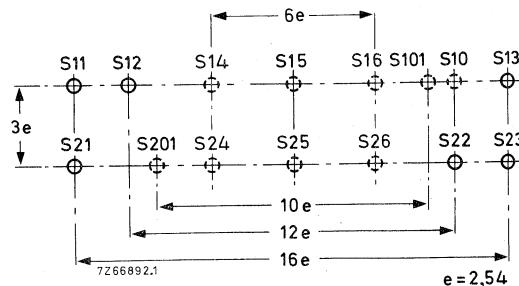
Hole pattern of the printed-wiring board for a tandem potentiometer (viewed on component side).
